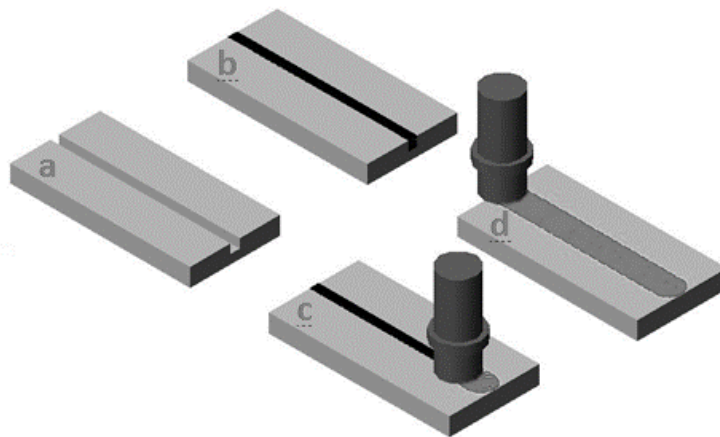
FSP procedure to fabricate surface composite: (a) making a groove, (b) compacting the groove with particles, (c) processing using a pinless tool and (d) processing using a FSP tool
